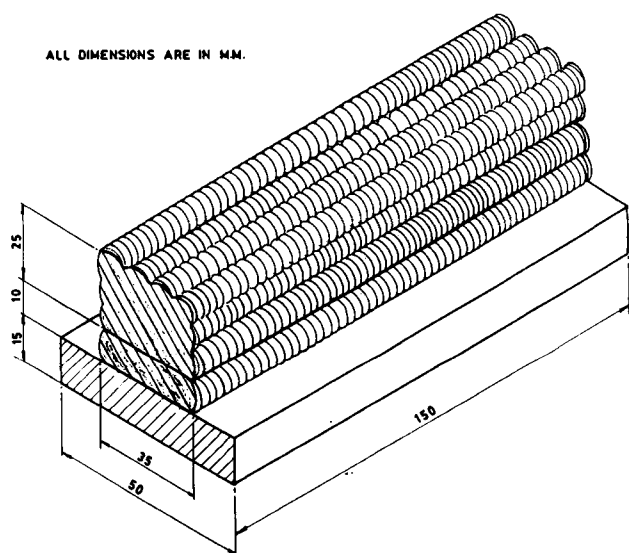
A schematic of the bead-on-plate weld pad.
